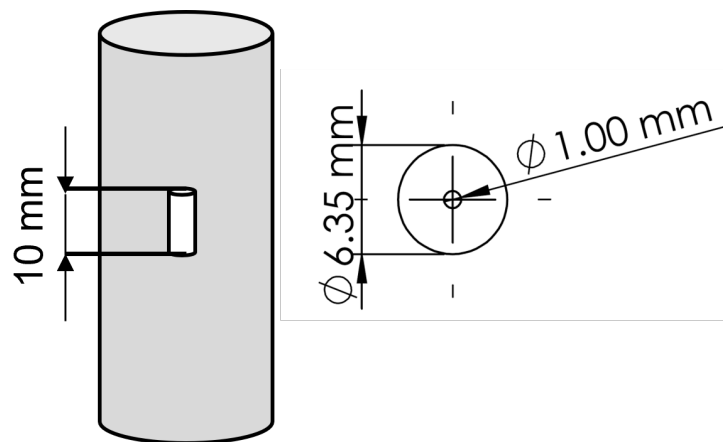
Illustration of cylinder fusion defect size; outer diameter of specimen is 6.35 mm and length of 1.00 mm diameter defect is 10 mm..
